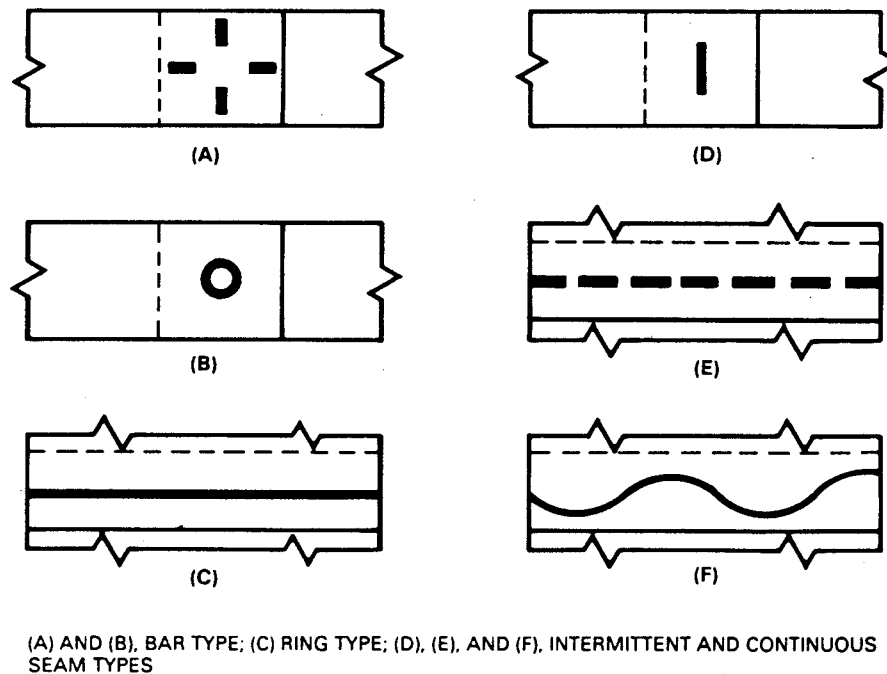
Typical Lap Weld Indentor Configurations Used in Cold Welding
